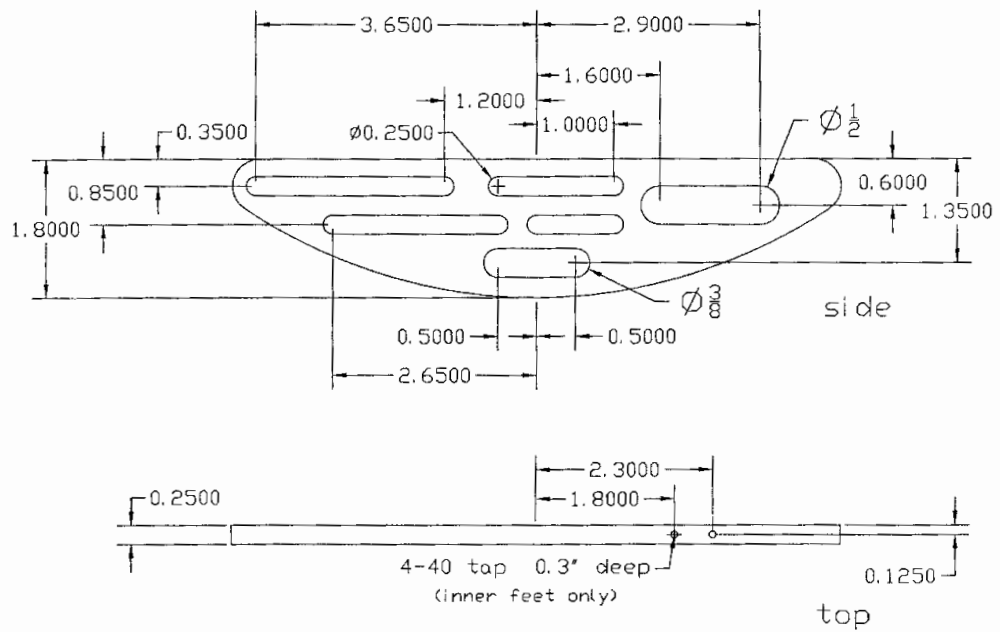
CAD details of the feet. They are cut from 0.25 inch thick aluminum plate.
